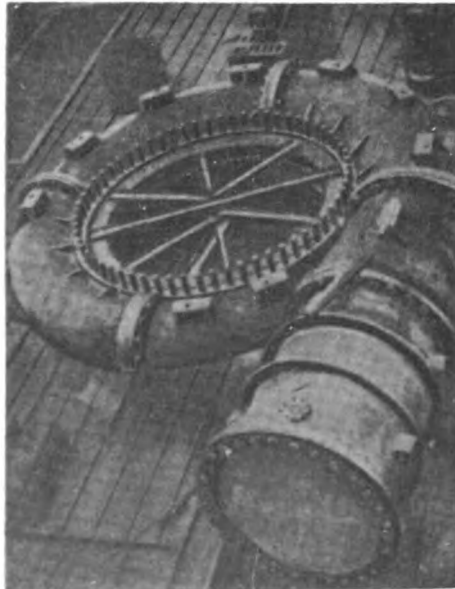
Shop assembly of a cast steel scroll casing
